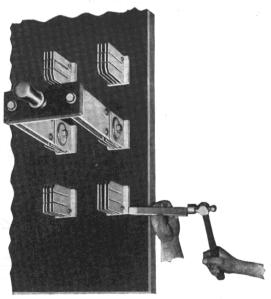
If the Hinge and Break Jaws are not in Line, They Should be Tapped into Position by Using a Fibre Bar and Machinist Hammer as Shown.
